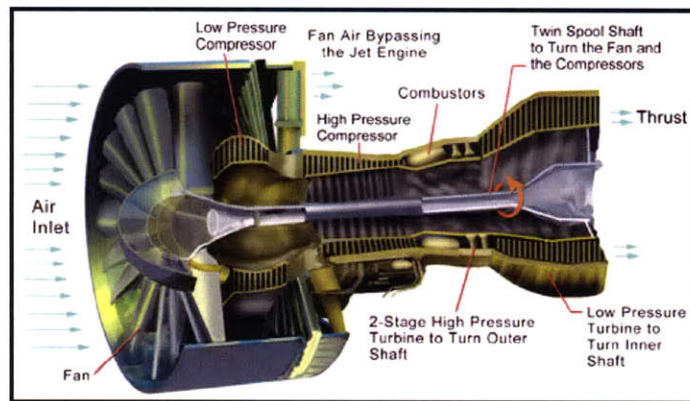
Cross section view of typical gas turbine engine (reprinted from [230])
